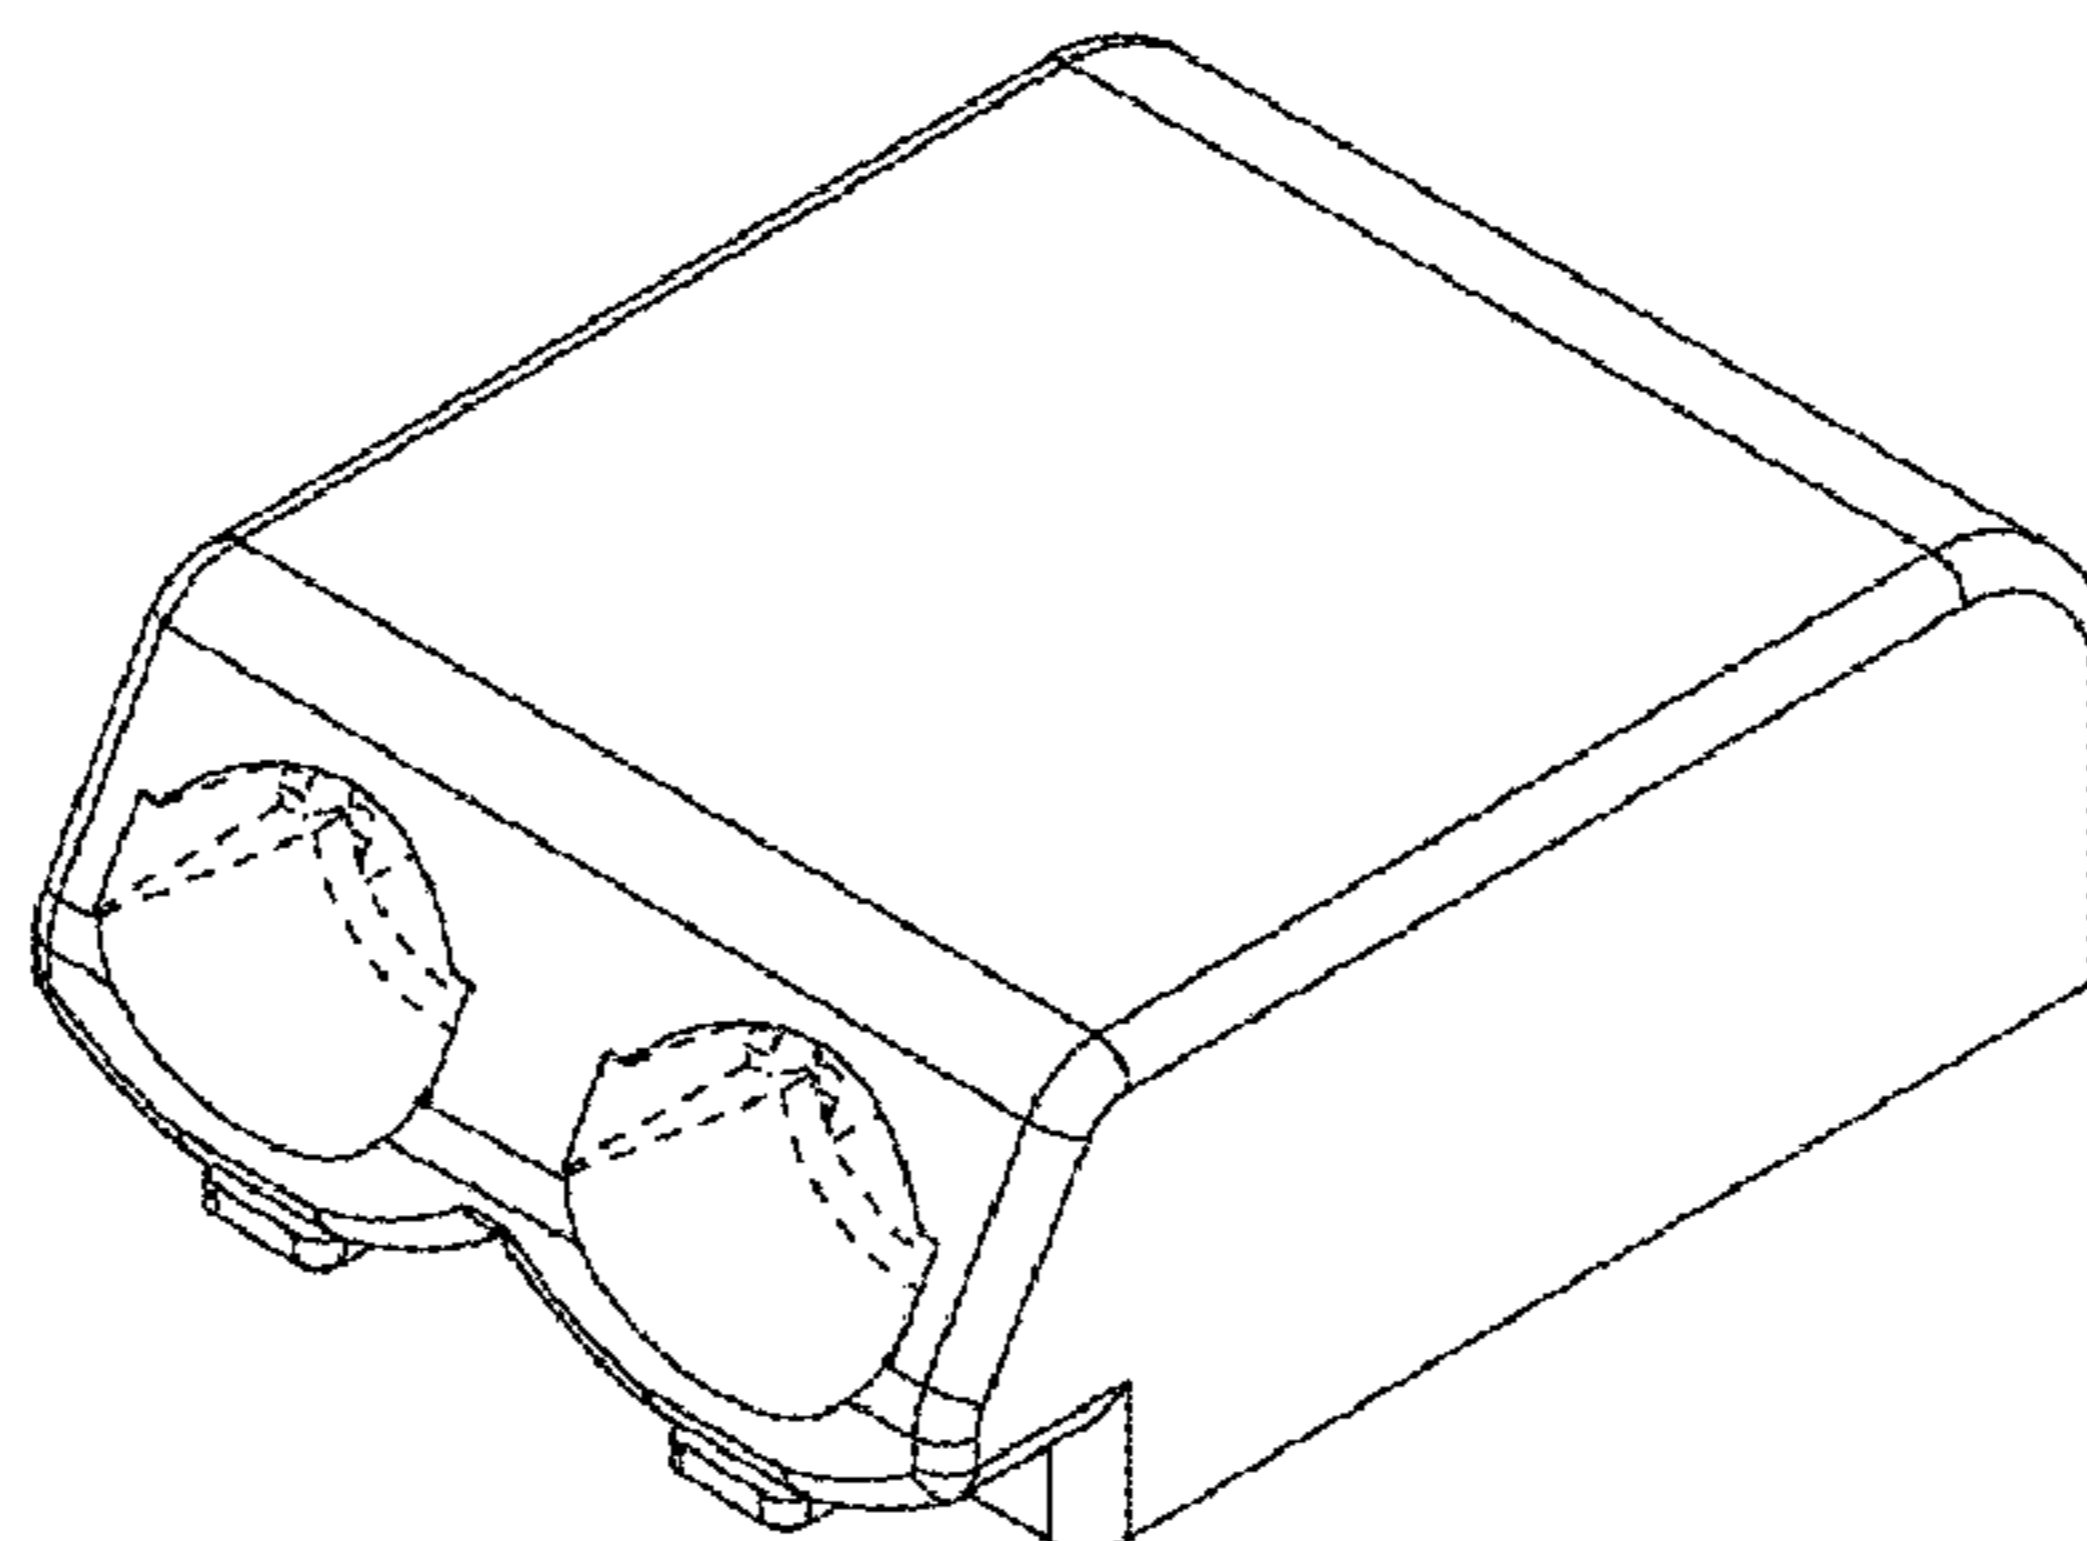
is a bottom-view of the electrical plug-in connector of FIG. 1.
